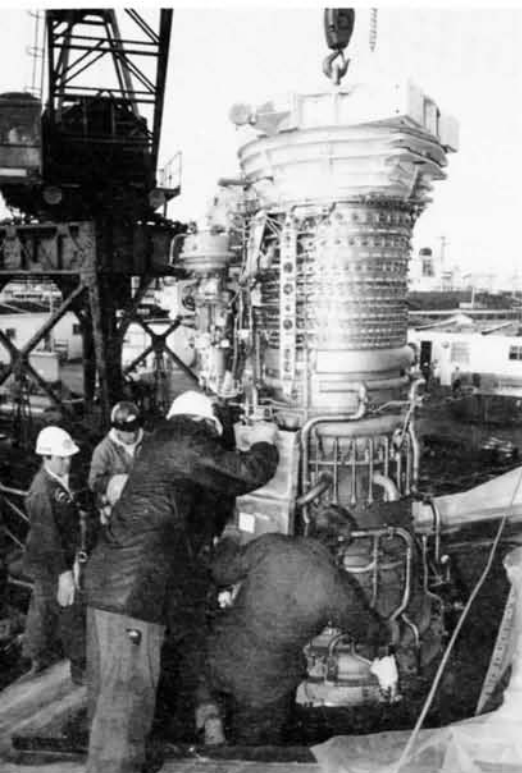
As it lifts clear of the top of the inlet housing, the gas generator is guided by the port-side rail extensions visible in the centre of the photograph.
